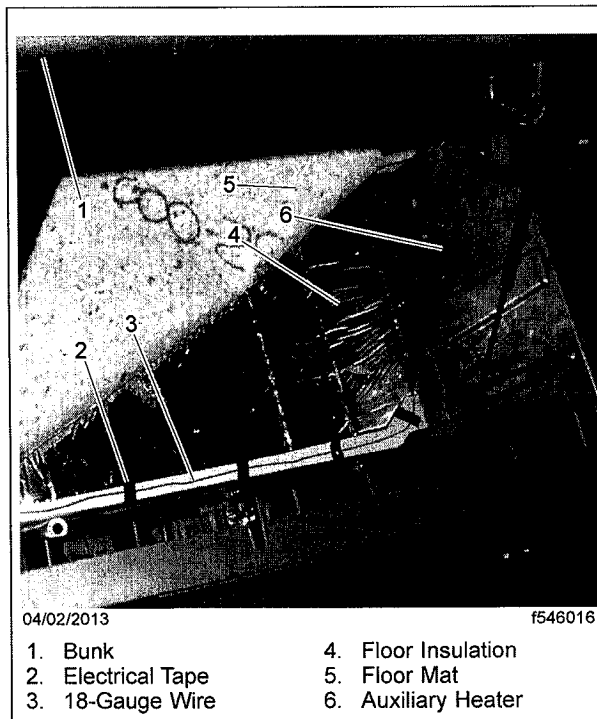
, Wire Routing Under Bunk (auxiliary heater installation shown)
